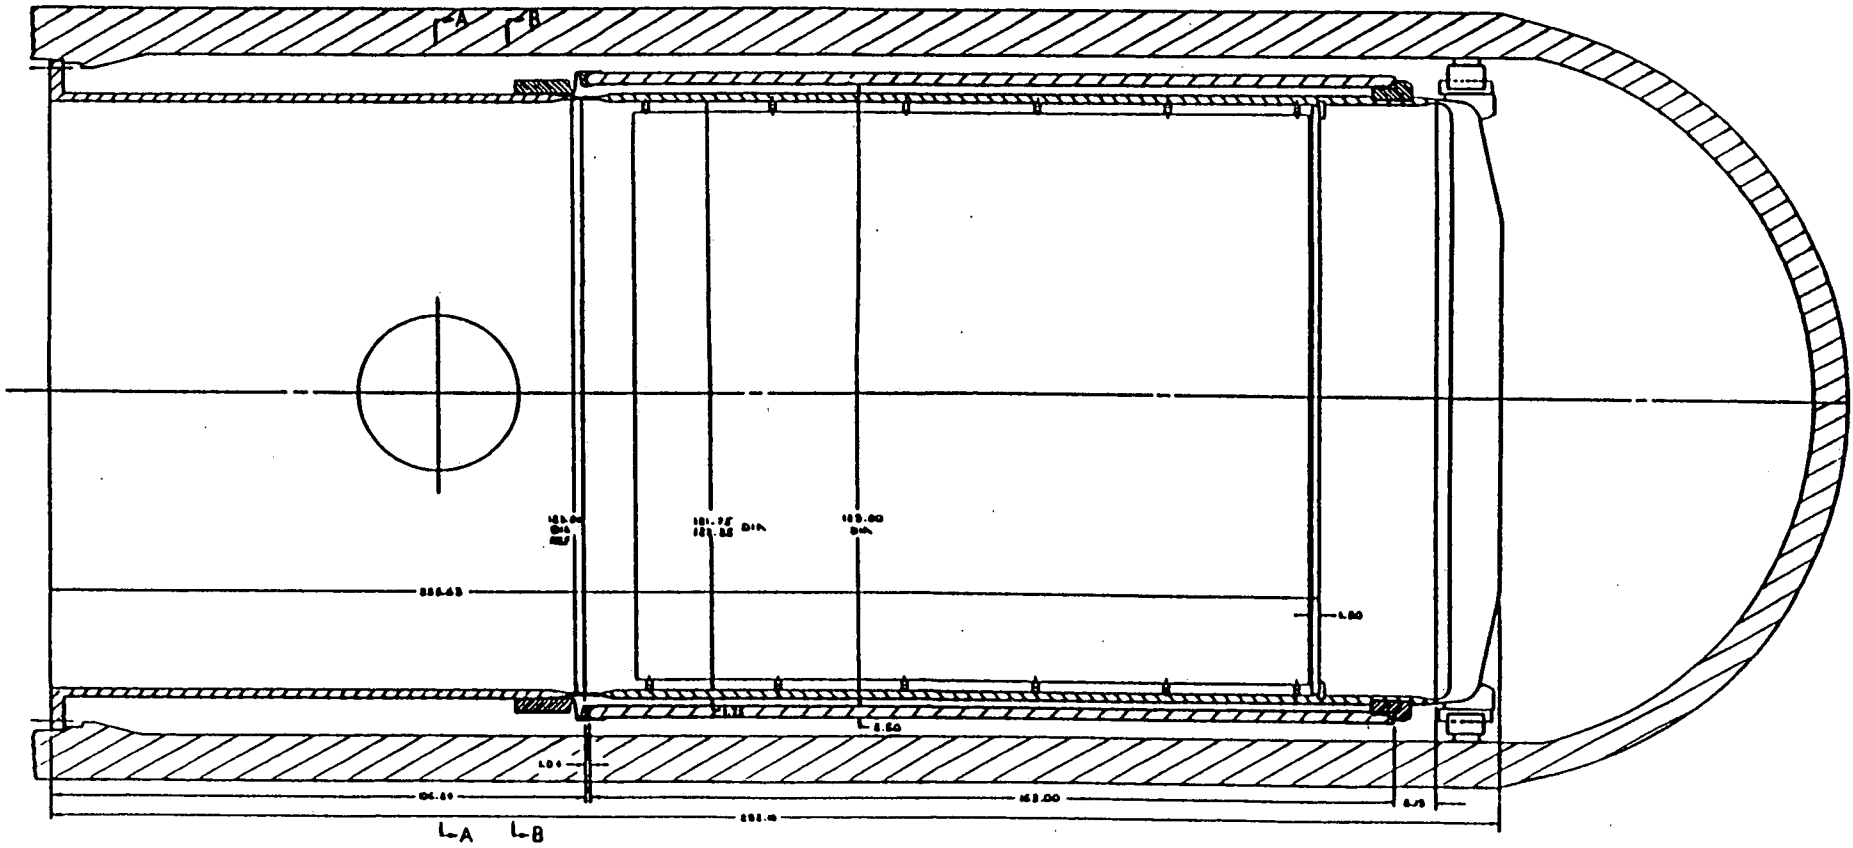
THERMAL SHIELD ASSEMBLY
